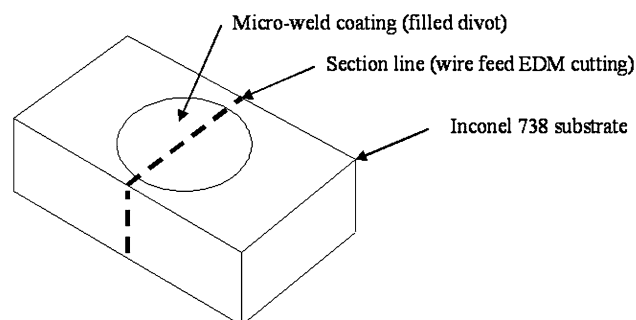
Sketch showing sectioning of micro-welded coated specimens
